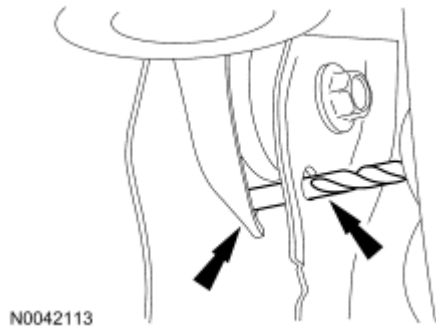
Locating Upper Arm With Hole In Body Bracket
